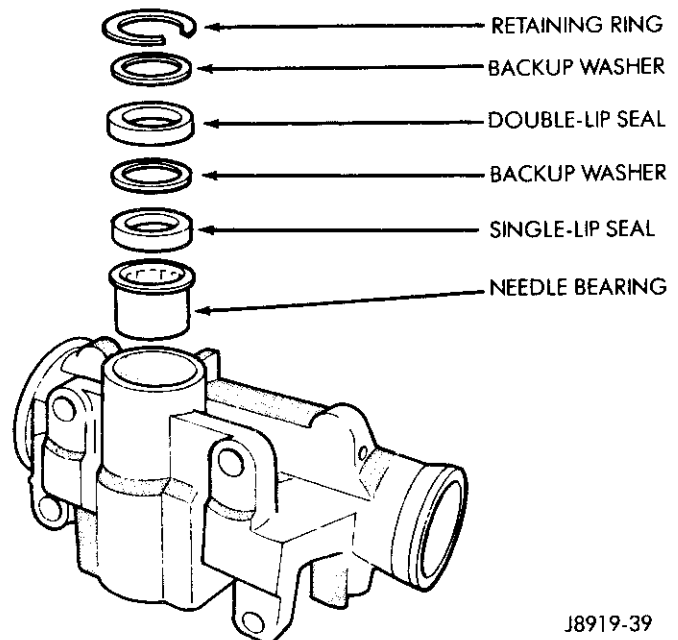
Pitman Shaft Bearing, Seals & Washers
